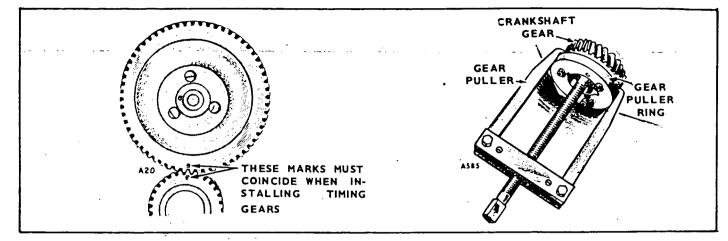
TIMING GEAR REMOVAL AND INSTALLATION
